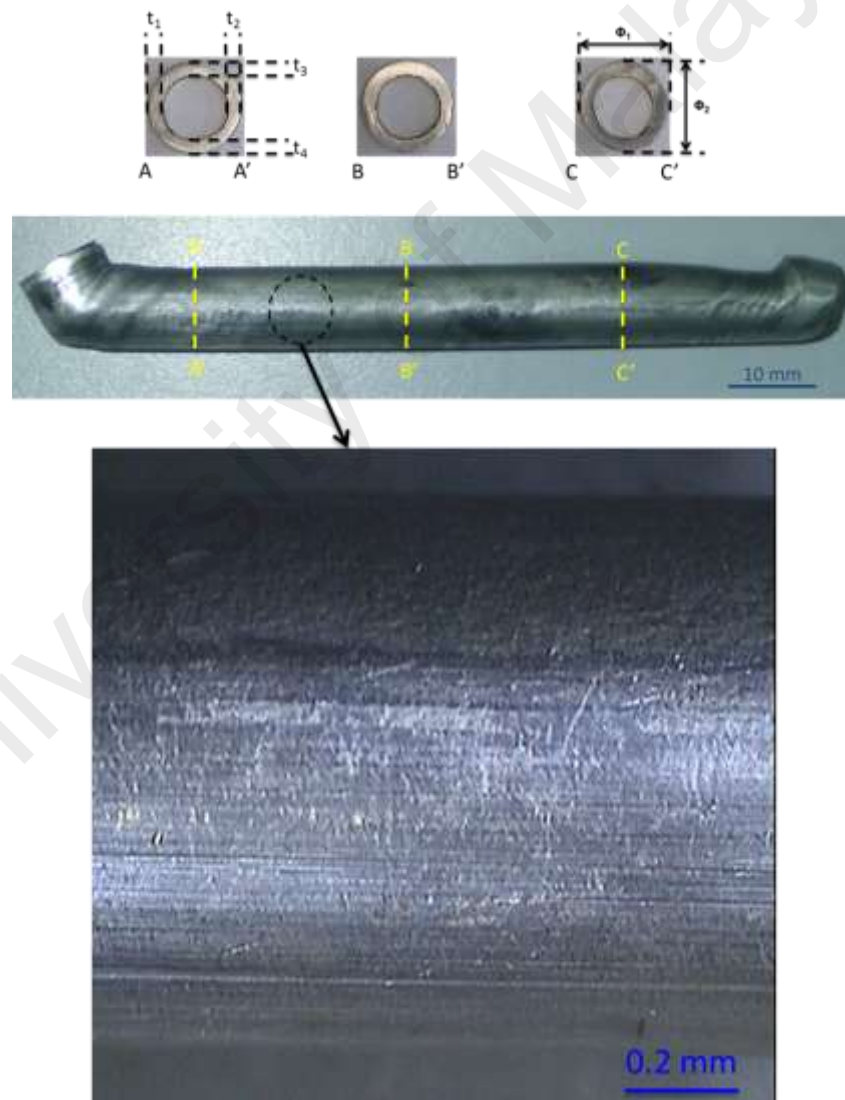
An overall view of the ECAE-treated tubular workpiece in addition to cross-sectional views of the three different sections and surface magnified view
